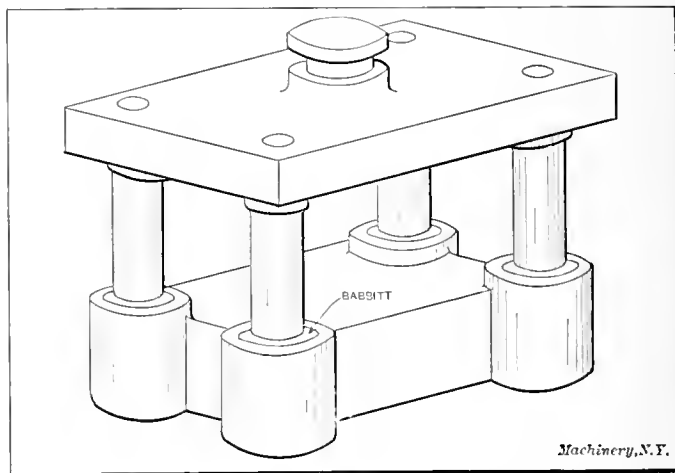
Die with Guide Posts inserted in Babbitt Bearings
